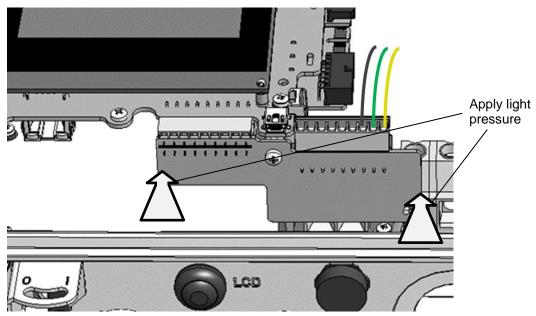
Attaching the Surge Protection Board to the Inverter Communication Board
